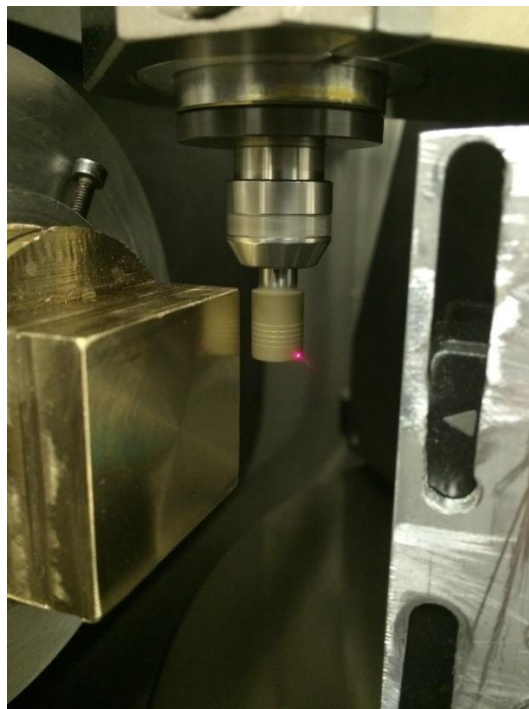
Grinding wheel in position with laser positioned to measure tool deflection
